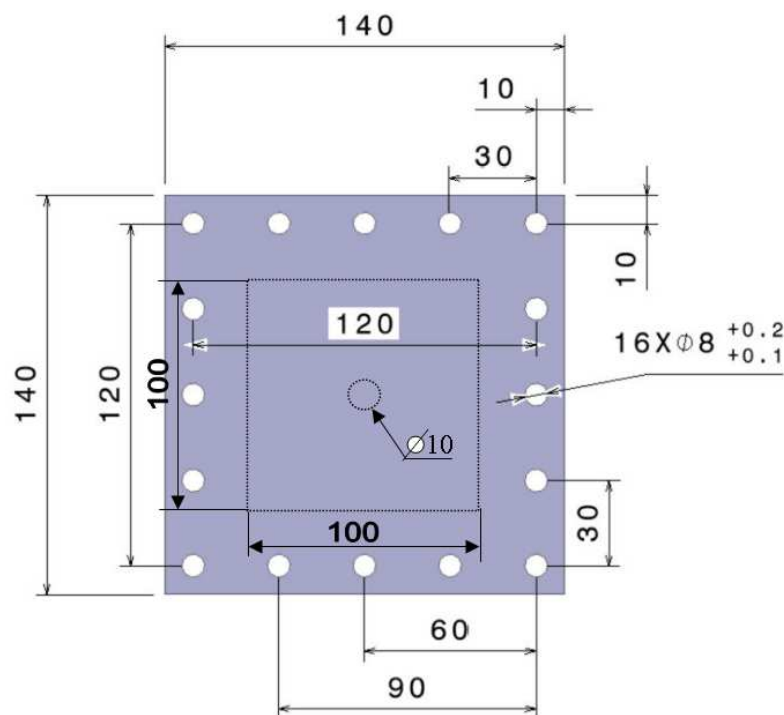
Dimensions and geometry of the specimens used in the experiments (mm). (Design R. Bernier)
